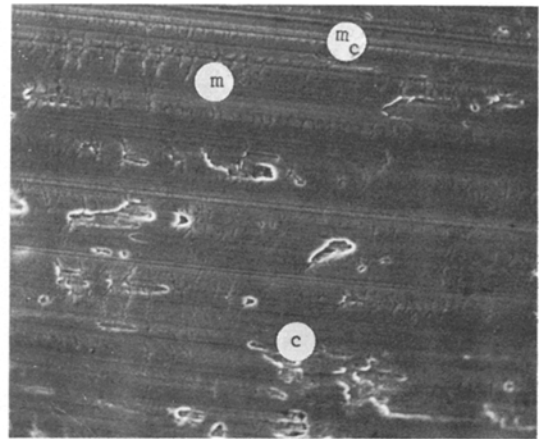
Scanning electron micrograph of machined surface. Cutting speed  $12.5 \text{ ft min}^{-1}$  ( $6.35 \text{ cm sec}^{-1}$ ); wearland length  $0.000 \text{ in.}$ ; rake angle  $25^\circ$ ; dry cutting.  $\times 300$
